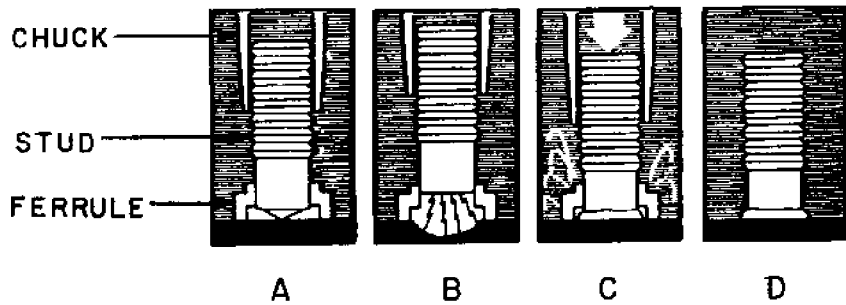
Equipment setup for arc stud welding [C33]
